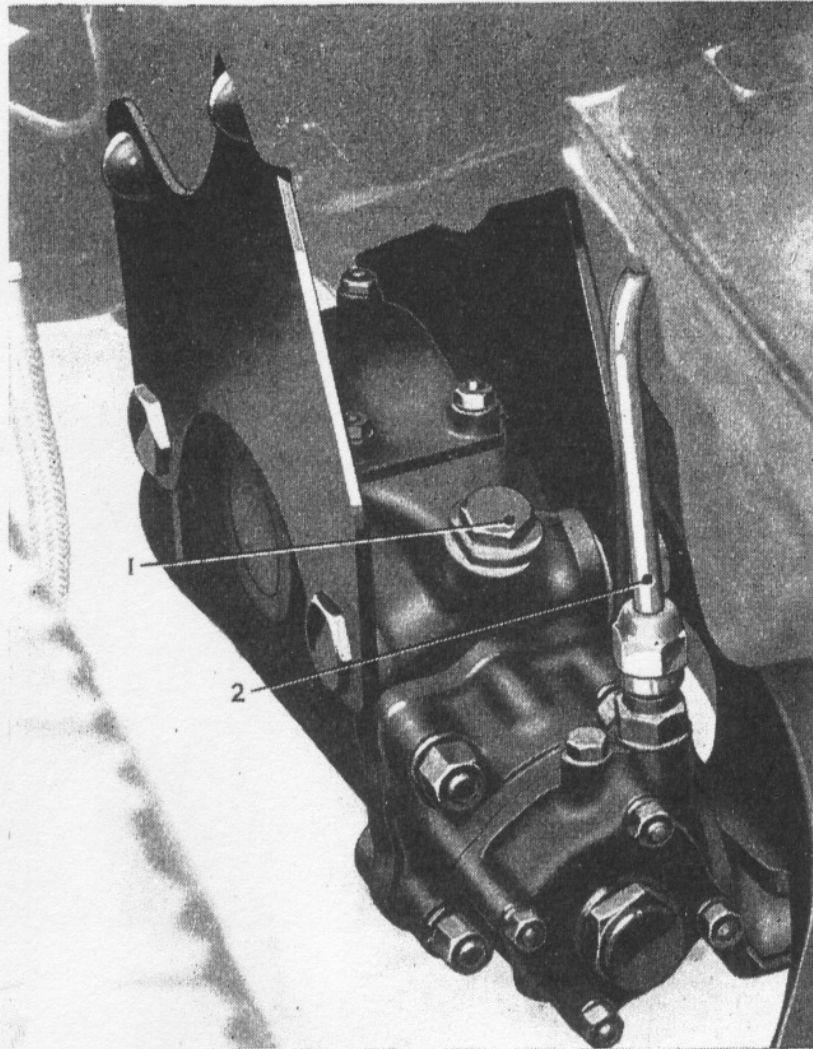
REAR HYDRAULIC SHOCK DAMPER.
